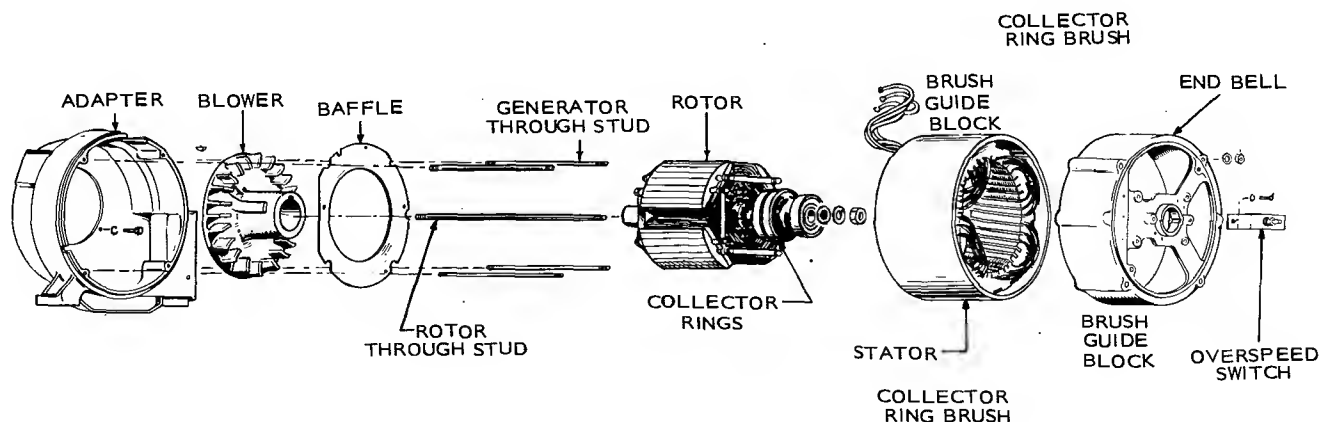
REVOLVING FIELD GENERATOR ASSEMBLY.
